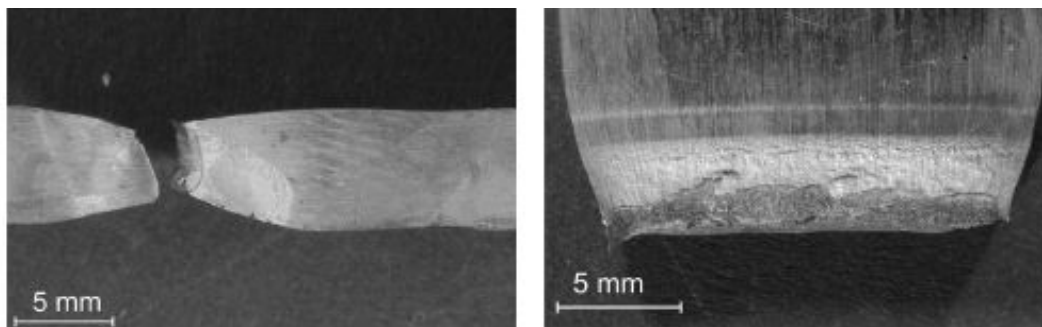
Fracture appearance of sample without weld reinforcement, sample thickness 6mm, cooling time 5.5s.
